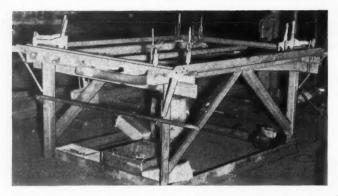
View of Fitting and Tack Welding Jig Designed for Welding Door Frames.
